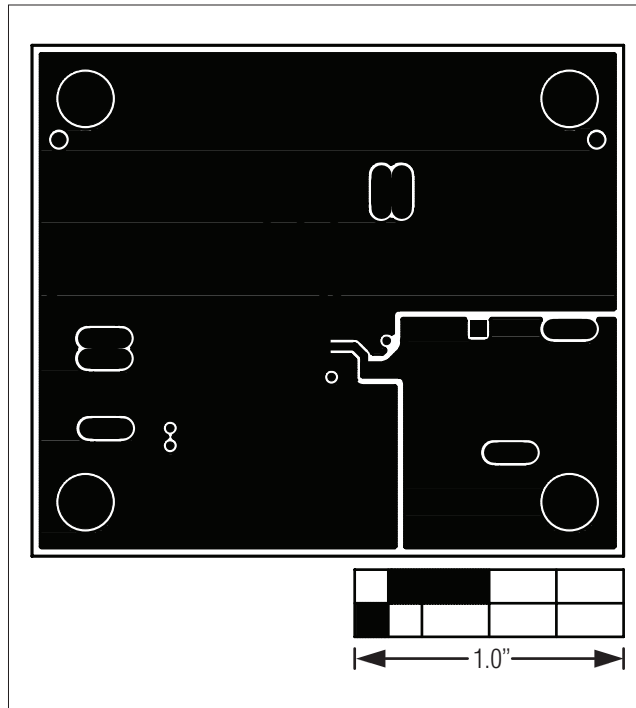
MAX15050 EV Kit PCB Layout—Inner Layer 2
